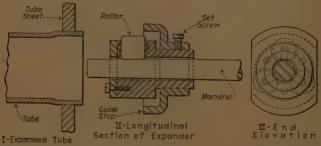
Method of expanding fire-tube end. (The outside diameter of the end of the tube illustrated at I above is intentionally shown distorted. This diameter remains practically the diameter of the remainder of the tube unless the tube hole is oversize.)
